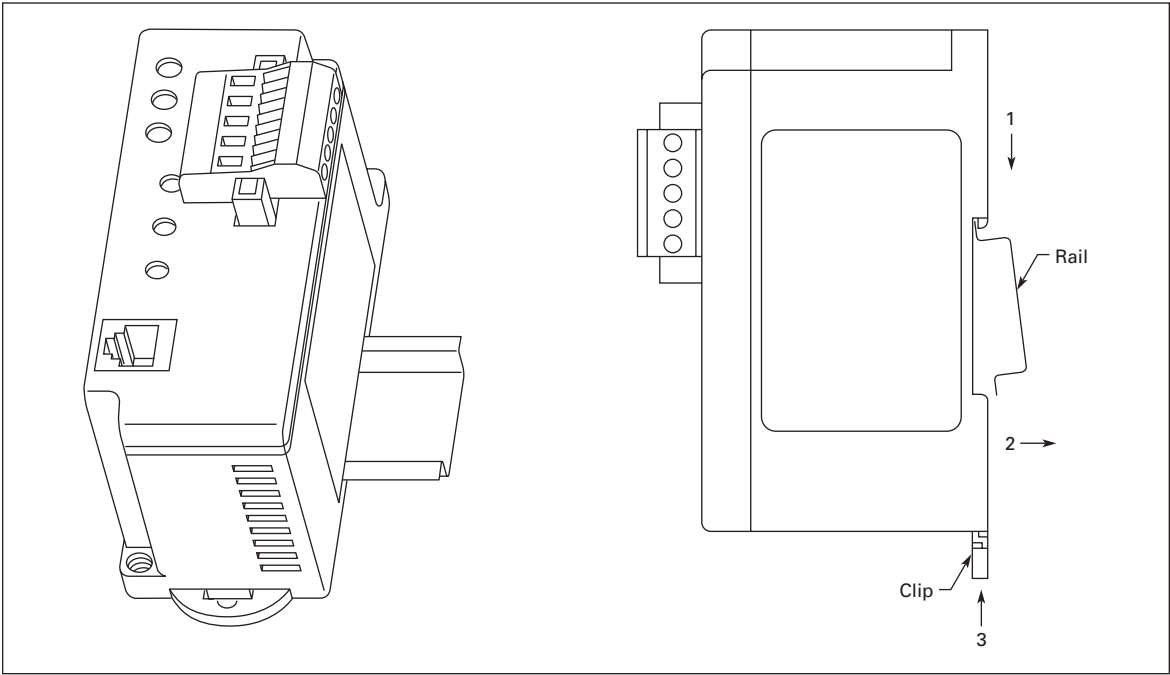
DeviceNet DN-02 DIN Rail Mounting
